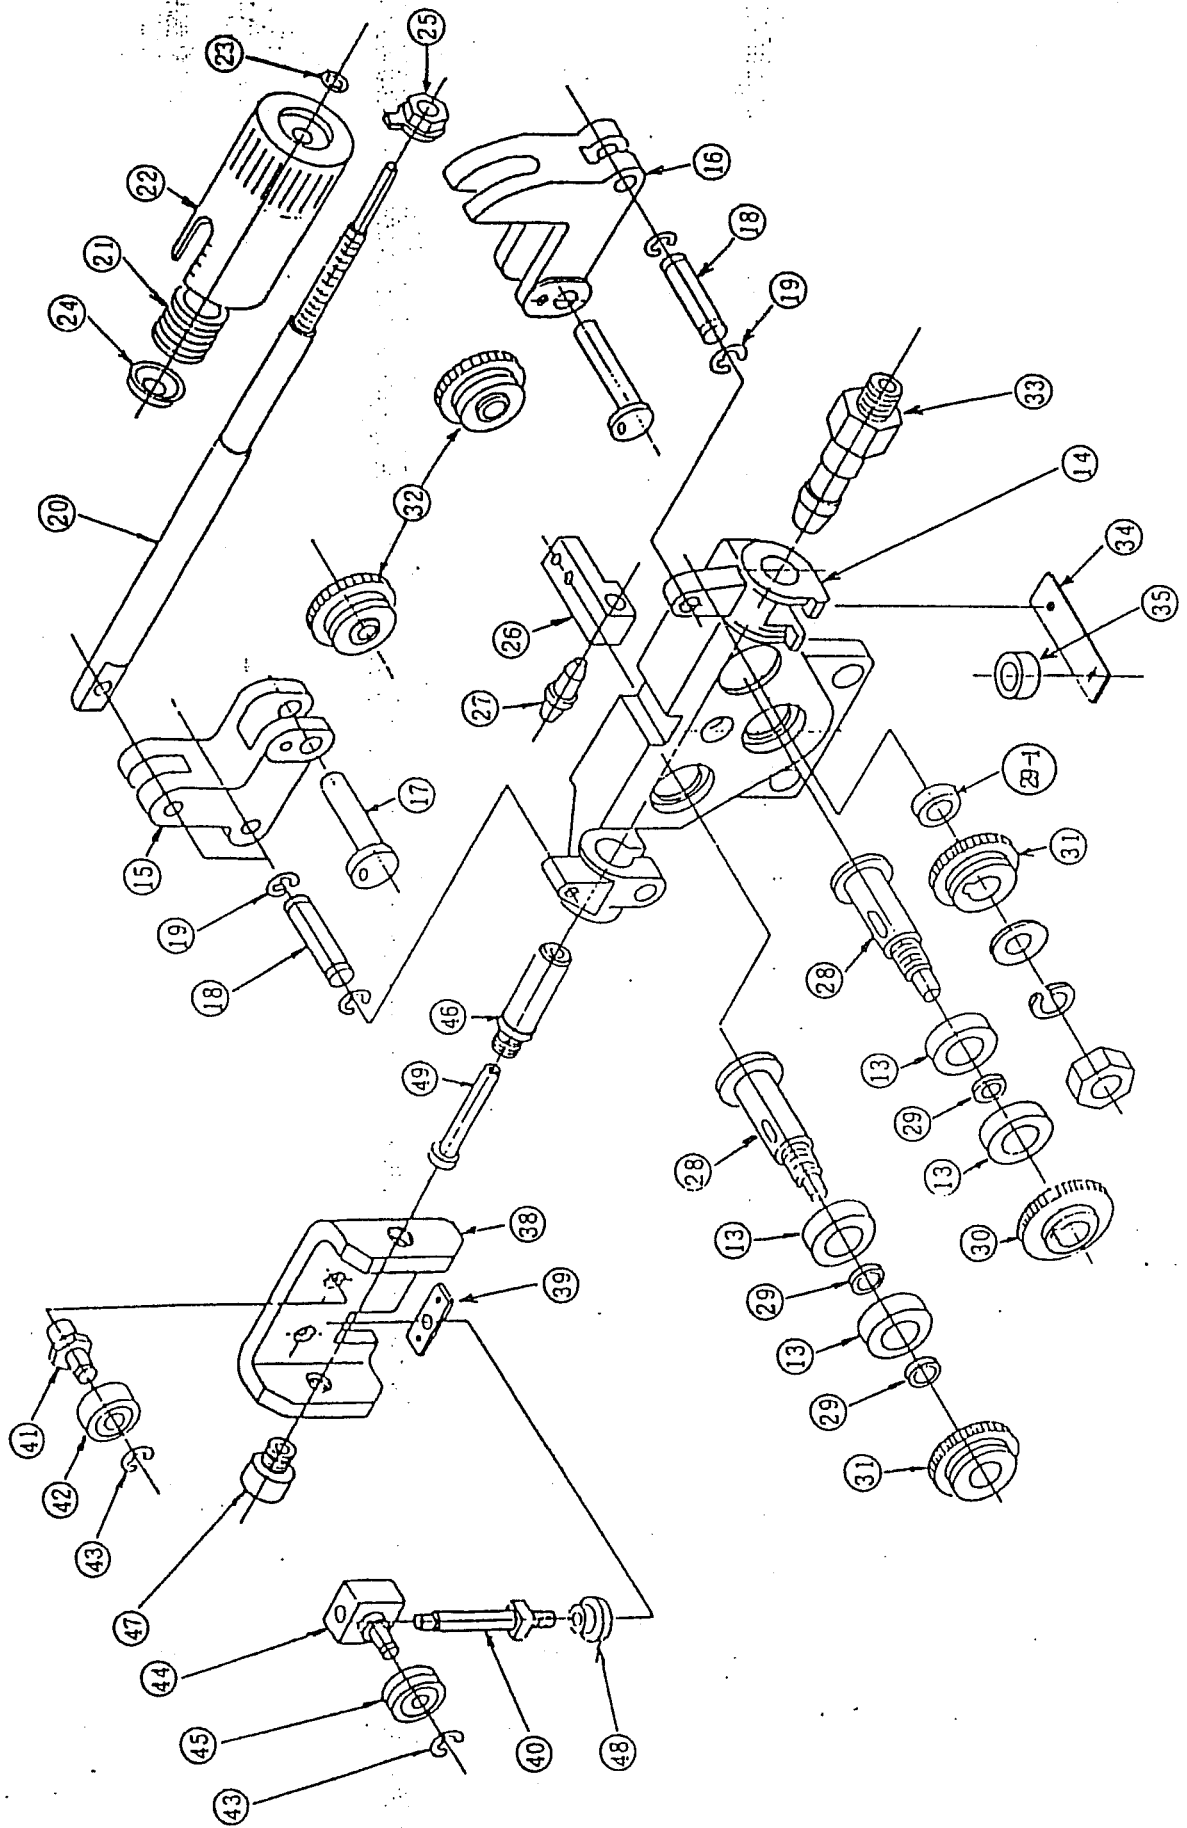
Disassembly Drawing of Wire Feed, Parts of Pressure
